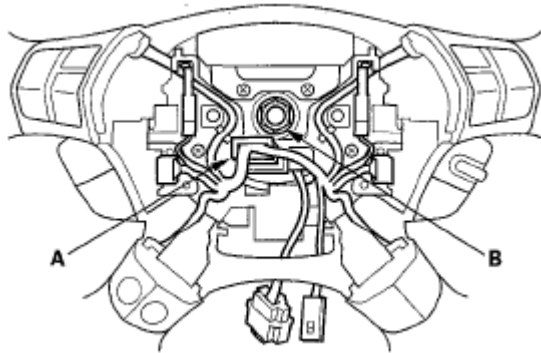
Identifying Cable Reel Connector And Steering Wheel Nut
